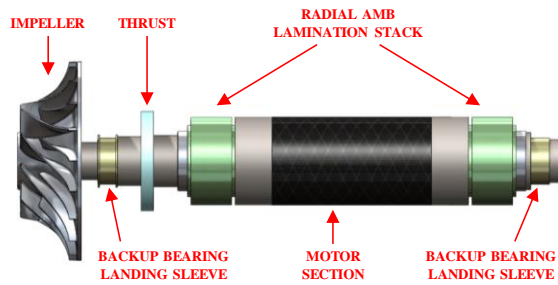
Schematic of High Speed Motor-Compressor Rotor. Sc
